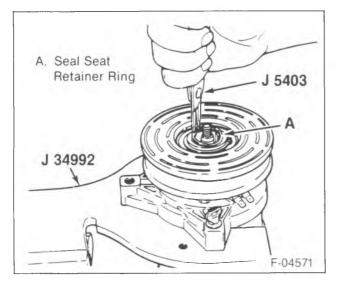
Removing or Installing the Shaft Seal Seat Retainer
